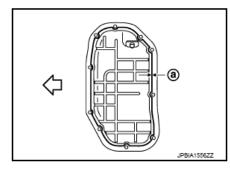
Identifying Bead Of Liquid Gasket On Oil Pan (Lower) Courtesy of NISSAN MOTOR CO., U.S.A.
